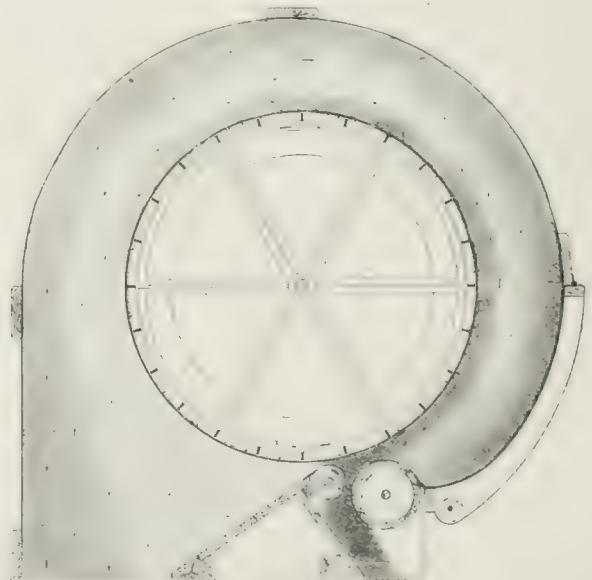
SECTIONAL VIEW OF THE CONDENSER, SHOWING METHOD OF OPERATION
